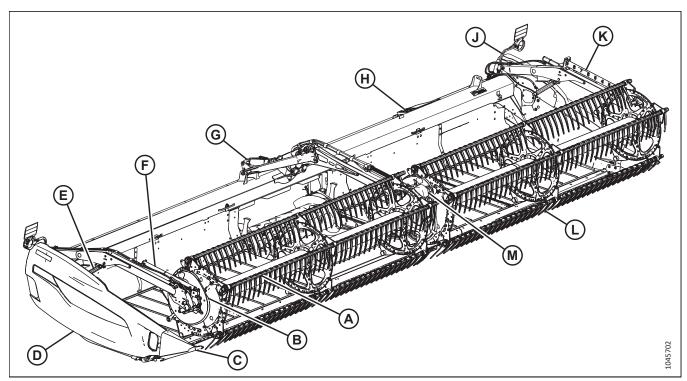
D2 Series Draper Header - Double Reel Shown
